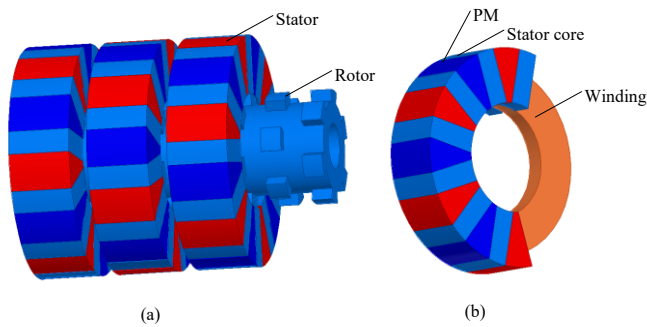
Main topology of the new FSTFMaLM, (a) the complete magnetic structure of the machine, and (b) one stator core module of the machine.
